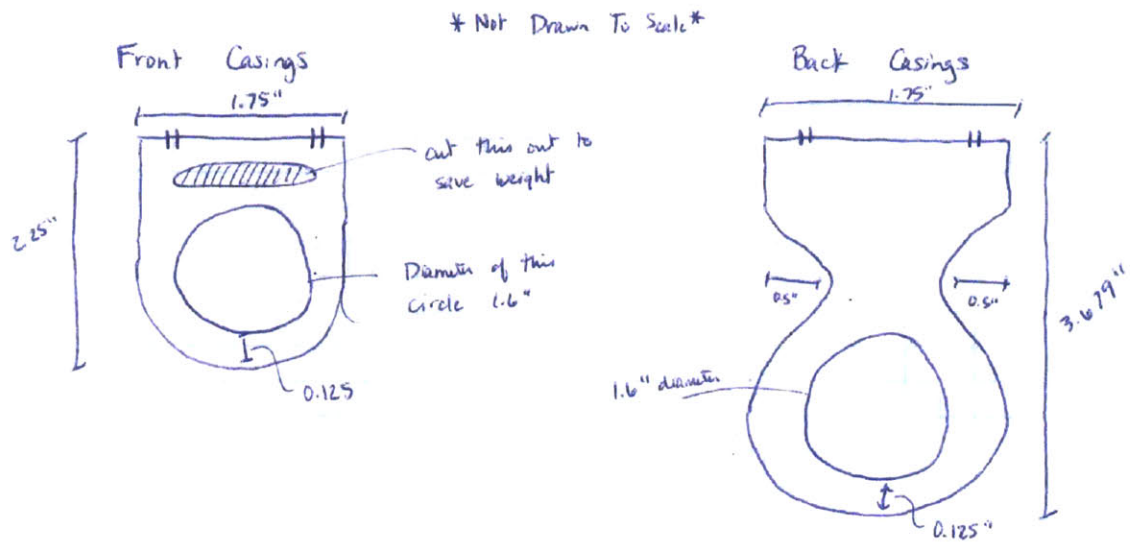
Dimensional drawing for bearings for hollow steel tube
